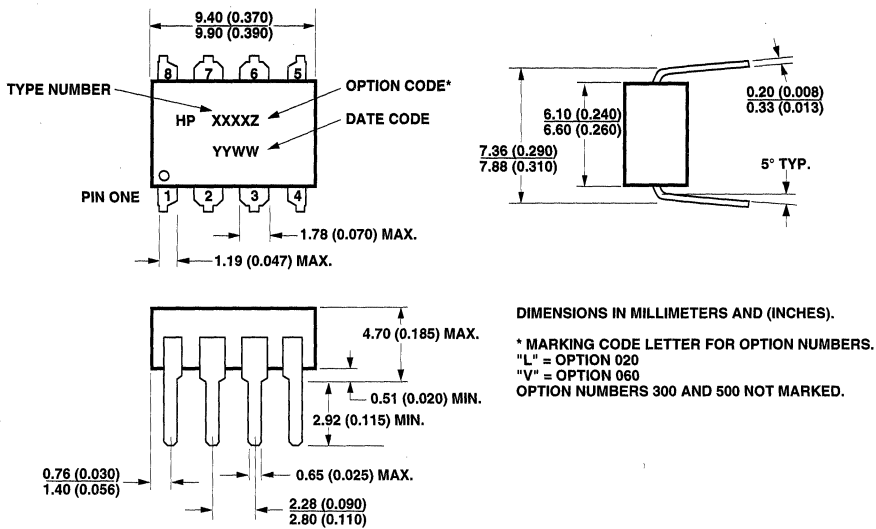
8-Pin Dual In-Line Package Device Outline Drawing.
